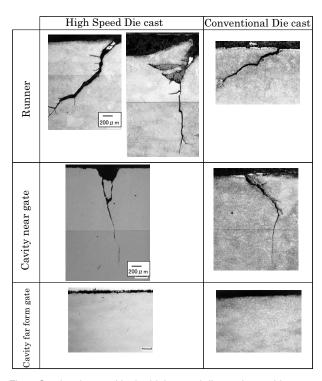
Cracks observed in the high speed die casting mold.
